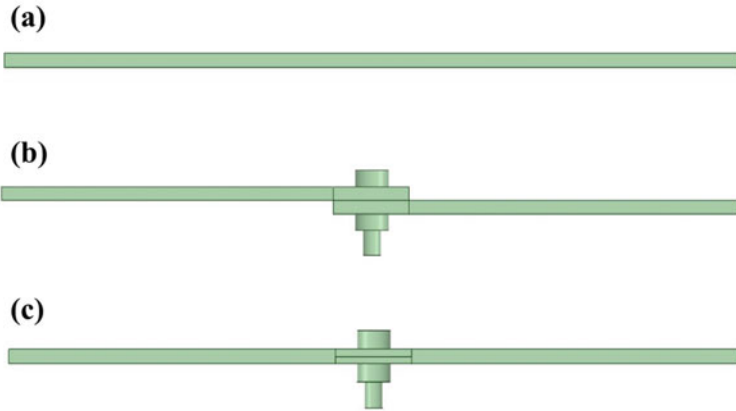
(a) Monolithic beam, (b) Lap joint beam, (c) Reduced Brake Reuβ beam
